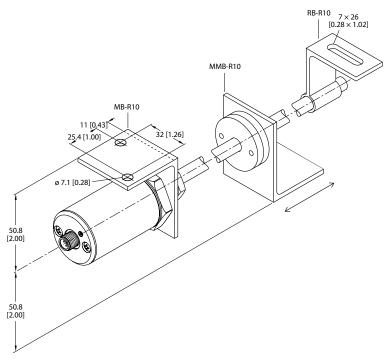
Mounting the device with mounting brackets (dimensions in mm)
